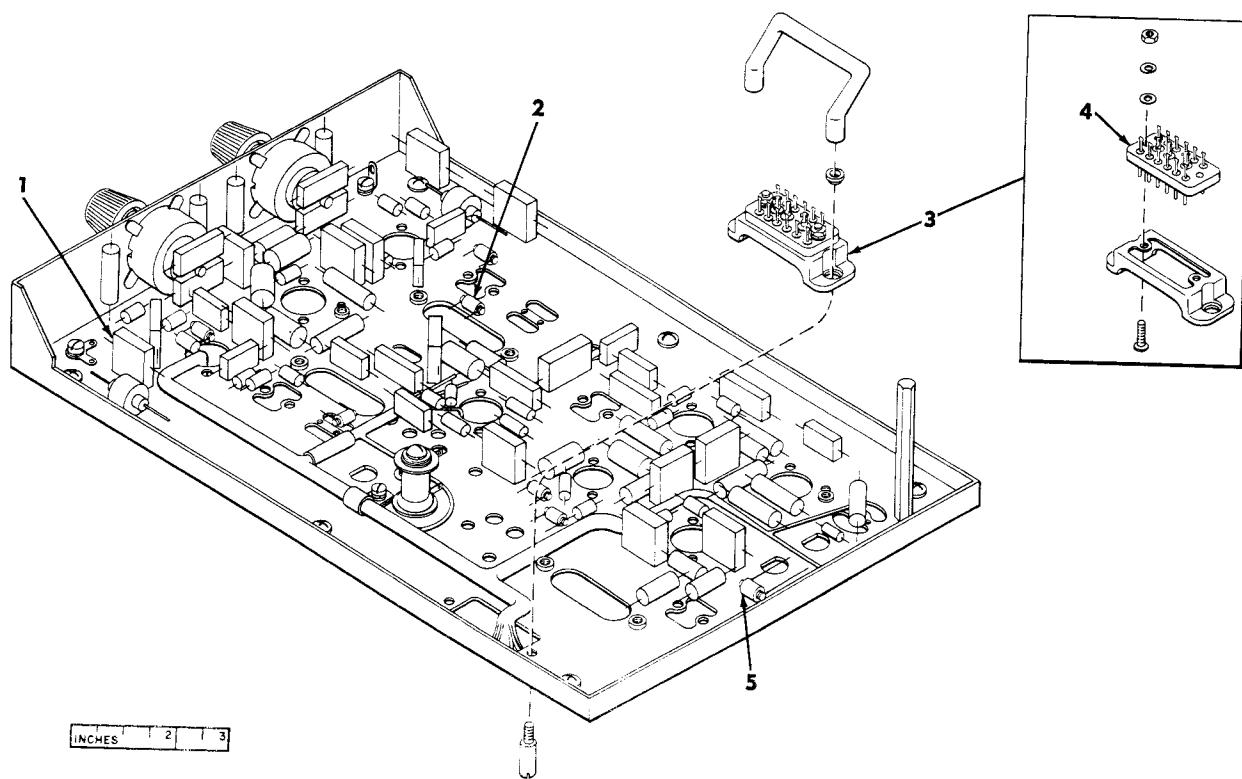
Generator assembly, pulse (9143996)—partial exploded view
